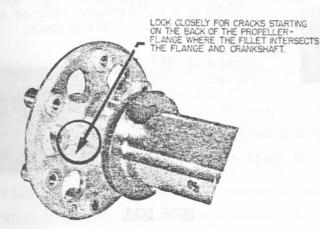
Rear View of Propeller Mounting Flange Showing Area of Lightening Holes
